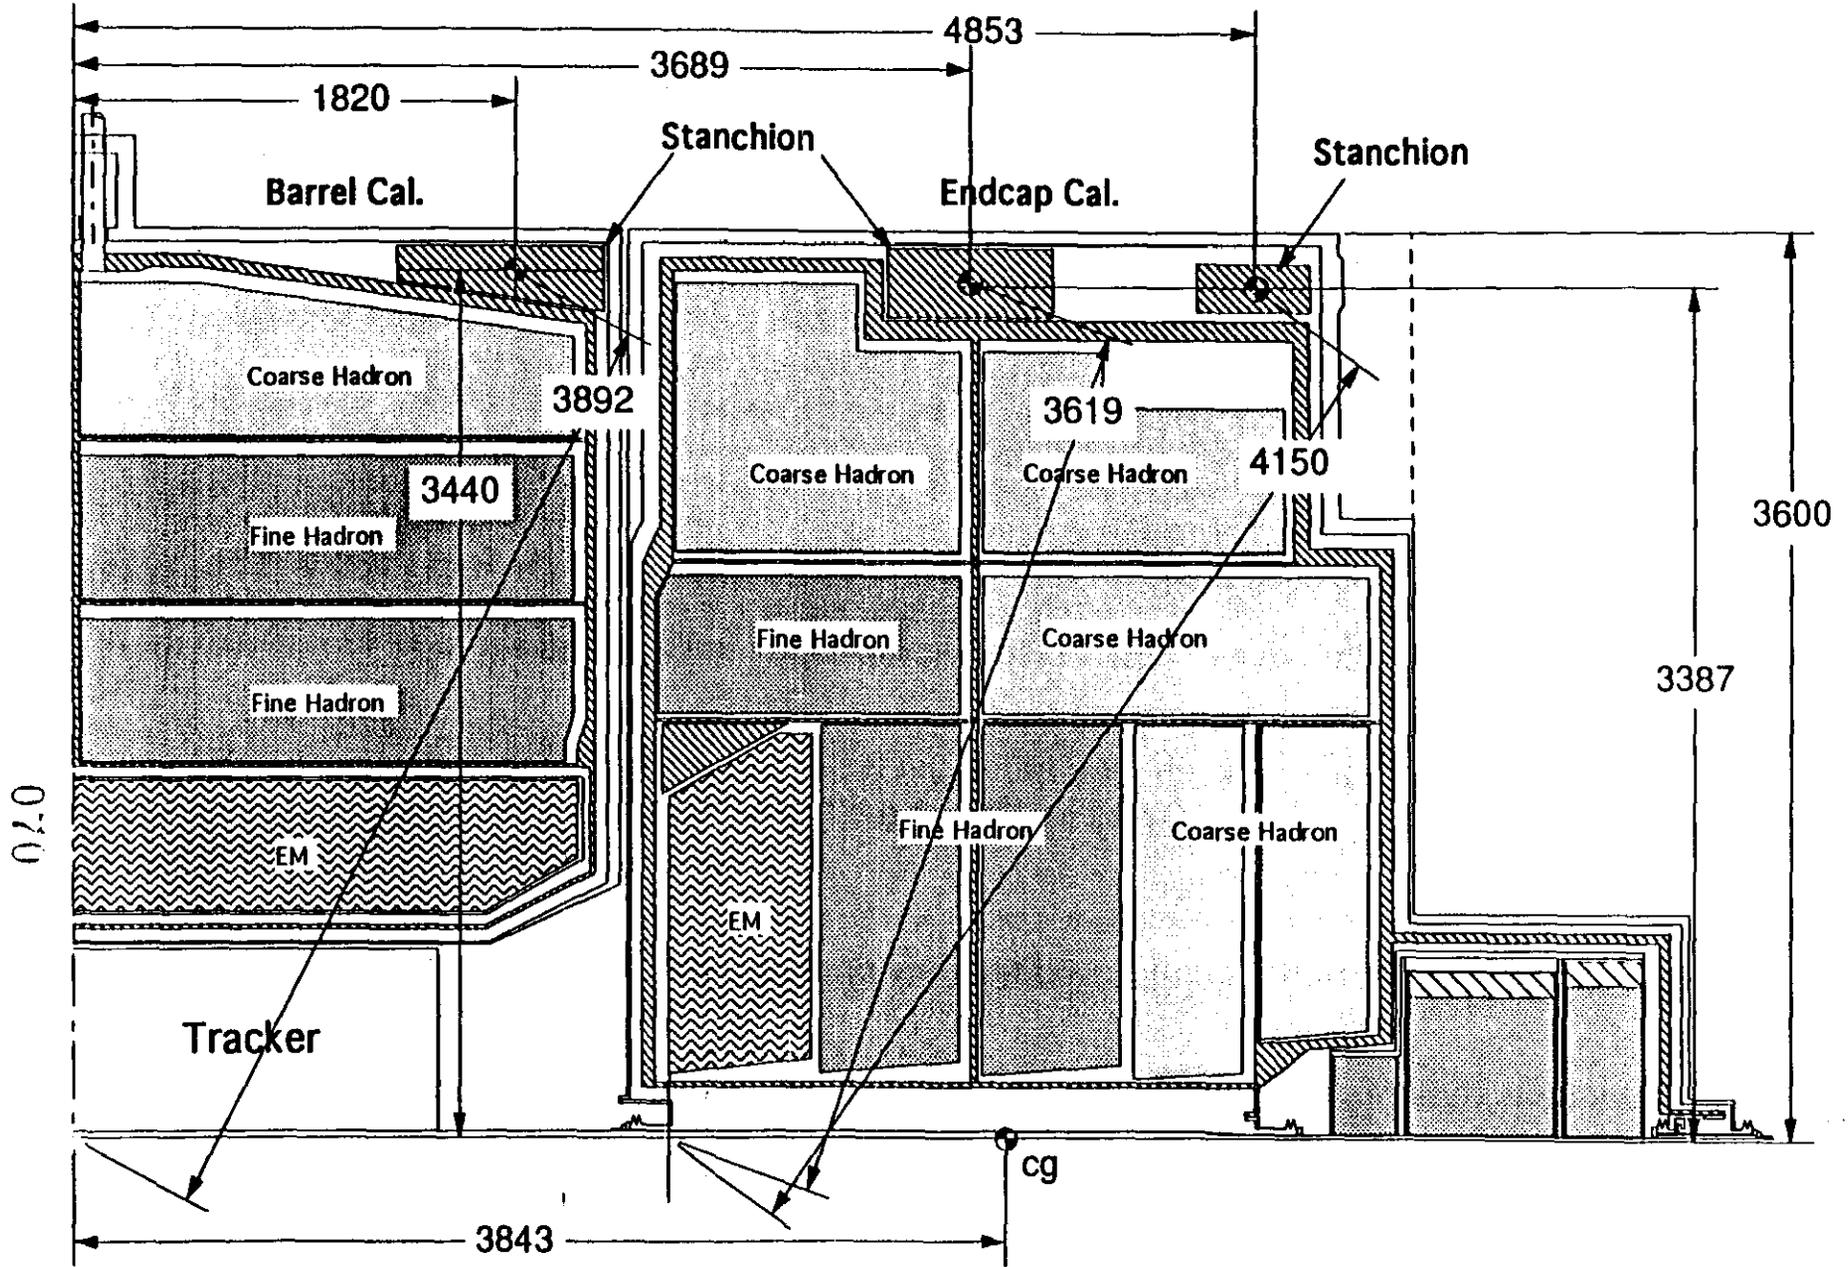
Plan View of Liquid Argon Calorimeter Showing Stanchion Locations
